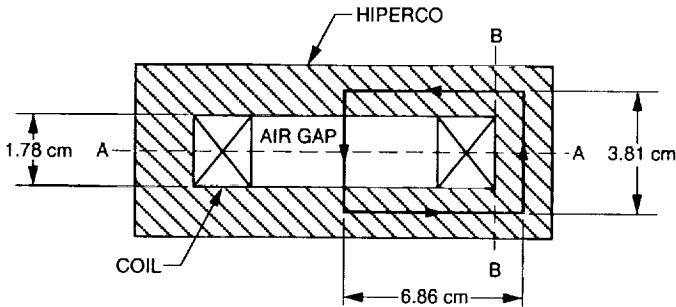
The transverse dimensions of the magnet assembly, including the contour used for the Ampere's law integration.
